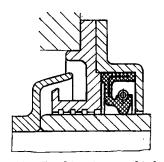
Combination seal: baffle disc, circular grooves, and oil seal unit
